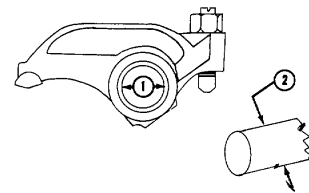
(N1039). Rocker levers, shaft and housing
